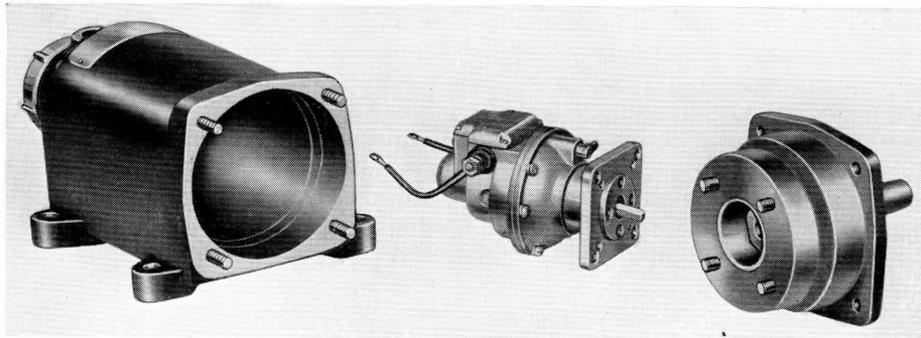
An internal view of the explosion-proof tachometer generator, showing the driving end and generator removed.
